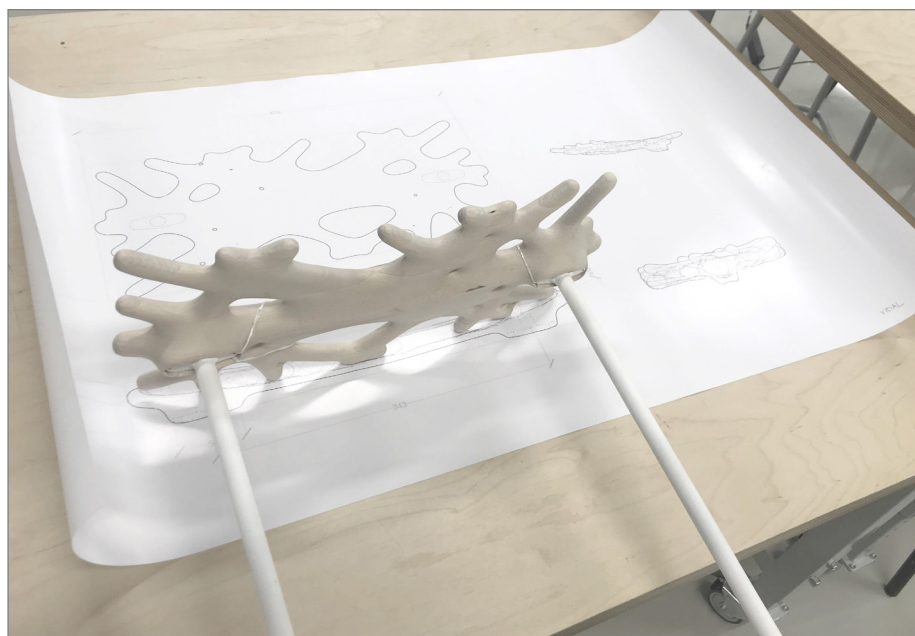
1:1 seat blueprints and CNC milled birch wood seat attached to the test structure.
